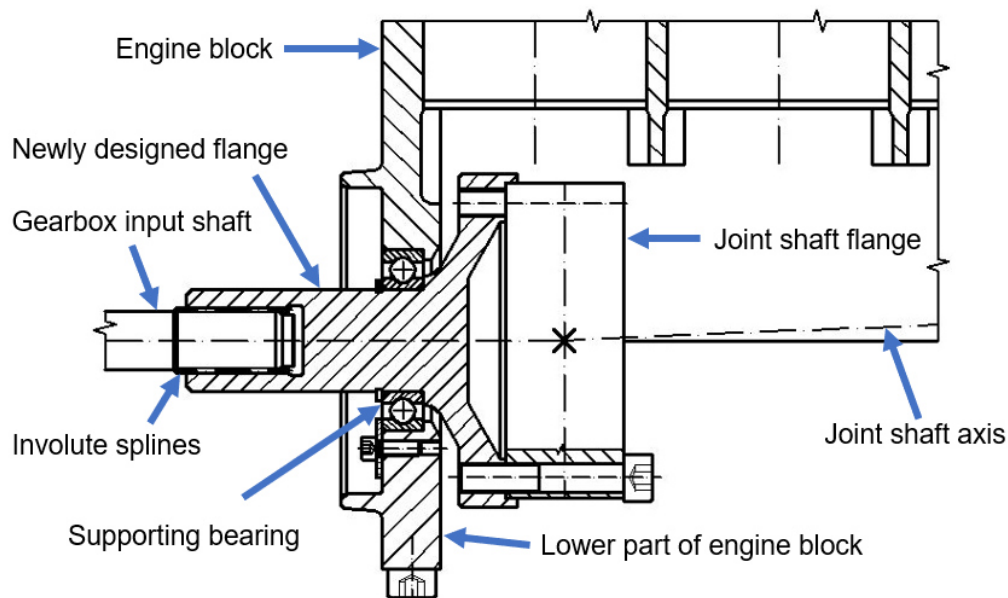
Cross section view of the new input flange and supporting bearing of the input shaft
